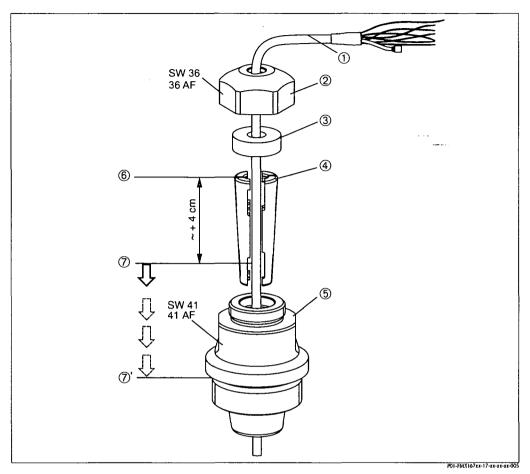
Installing the Waterpilot FMX167 with cable mounting screw, here depicted with G 1 1/2 thread
